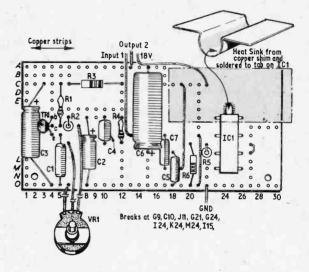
Layout of the components on the amplifier board. The copper heatsink is carefully soldered to the i.c. tab
